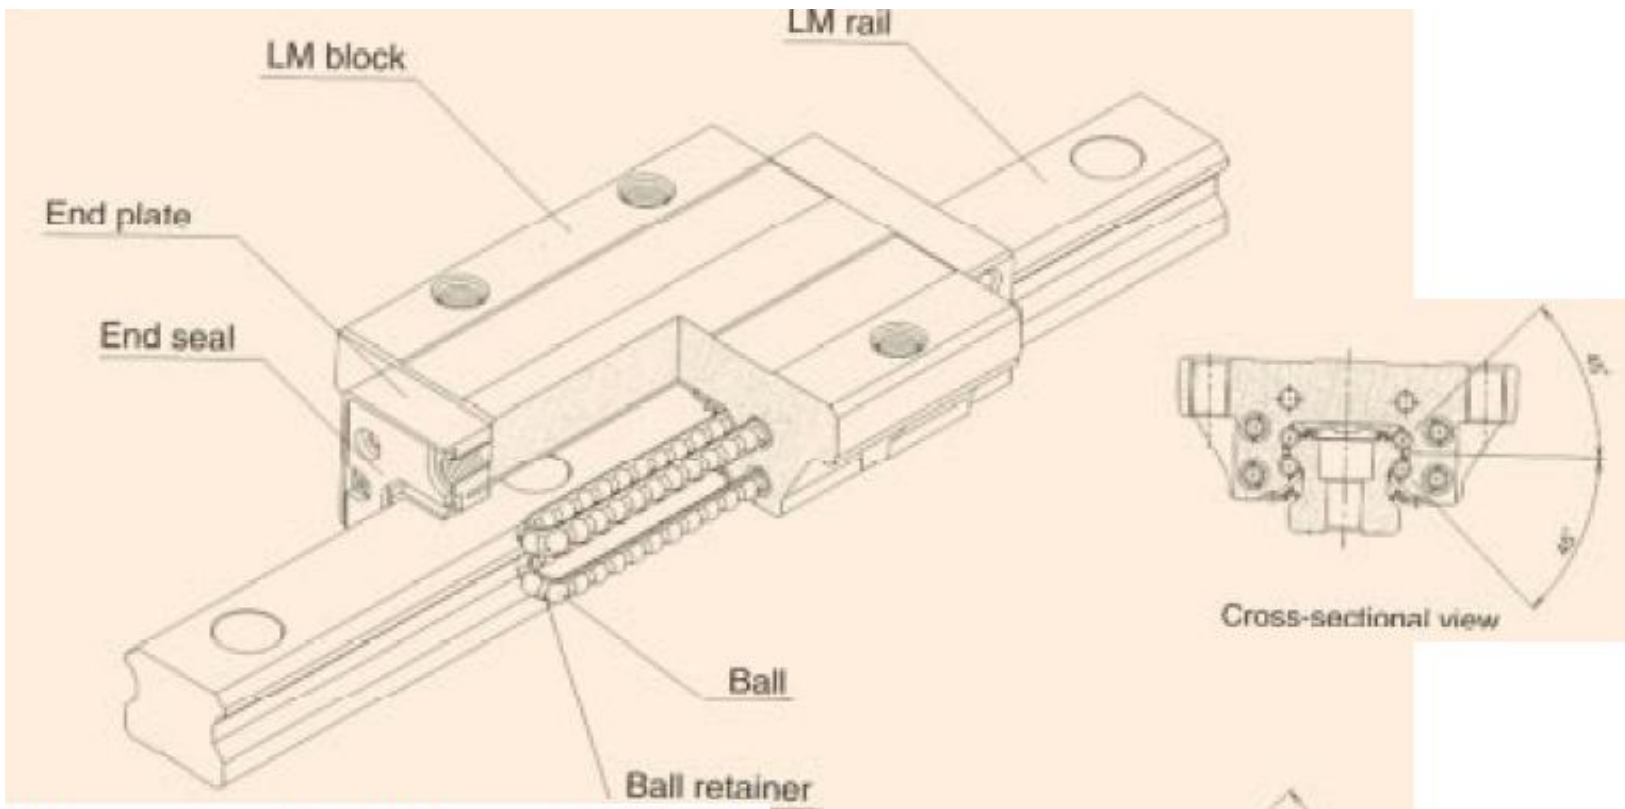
Antifriction guideways used in CNC machine tools
